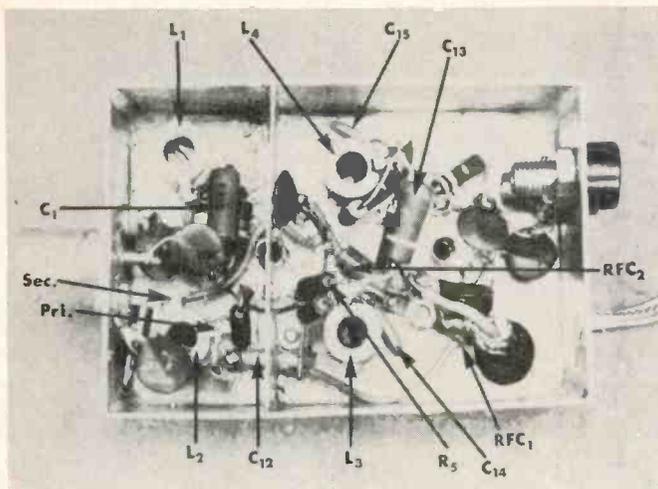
Bottom view of wired chassis. Main components and their locations are identified.
